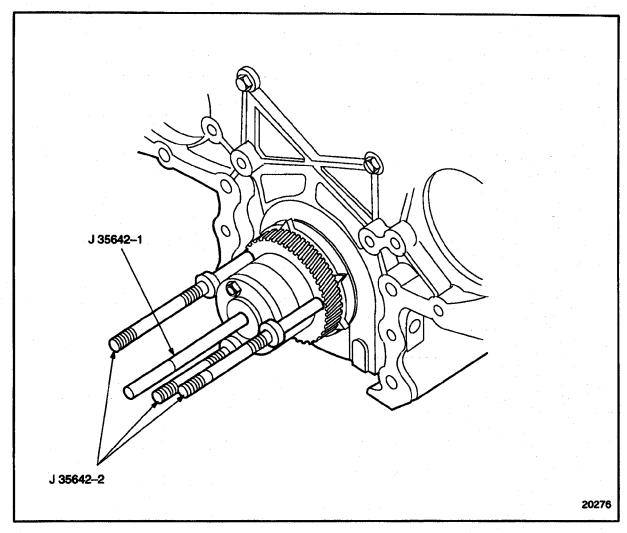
Installation of Crankshaft Timing Gear Removal Tools
